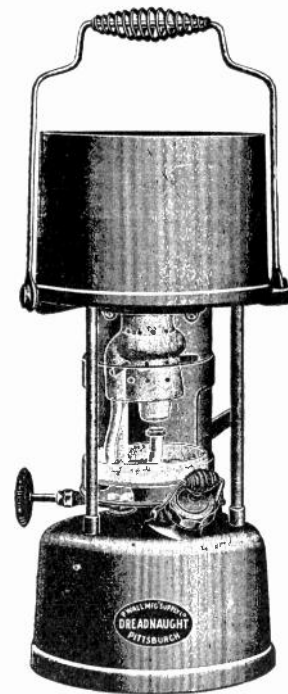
Gasoline lead melting pot for use in soldering large cables, and cable sheaths.
